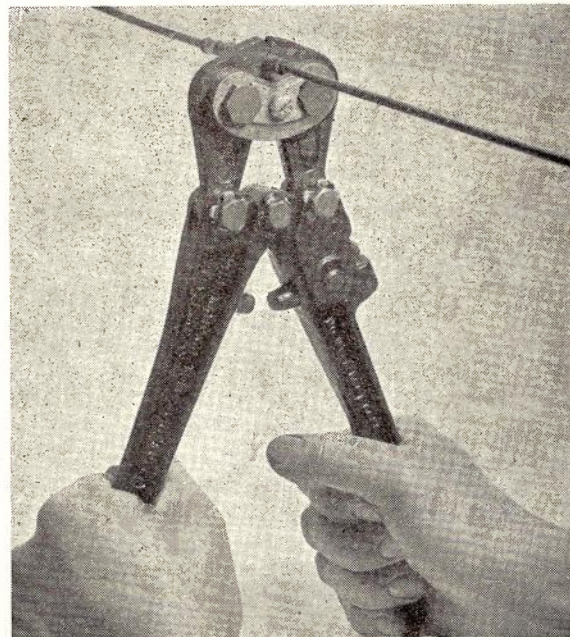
Pressed Sleeve (Nico-press) Crimping Tool.
